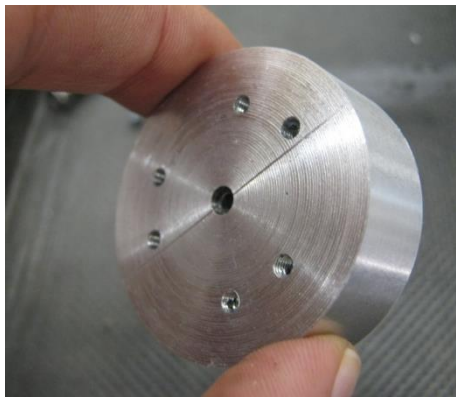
Aluminium block with threaded holes as dummy transducer.
